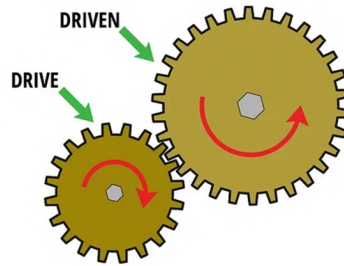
A driven gear inside the lift hooks on the gear inside the cell to drive the conveyor.
